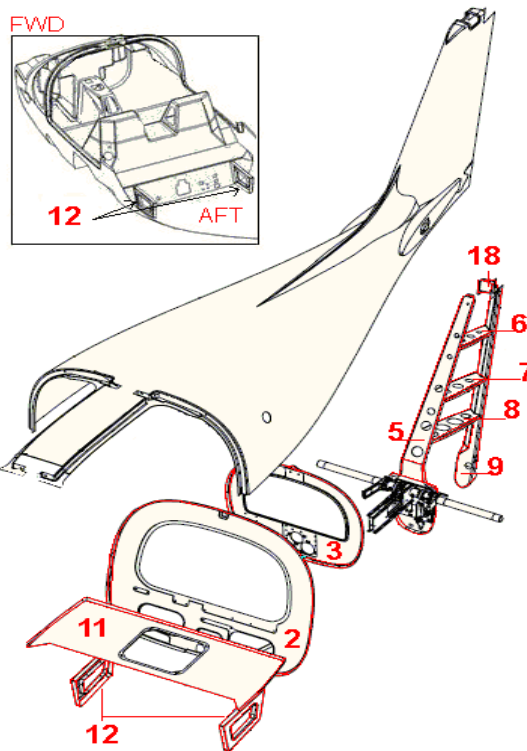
Upper Fuselage Bond Lines Detailing the Location of the Baggage Bay Supports
